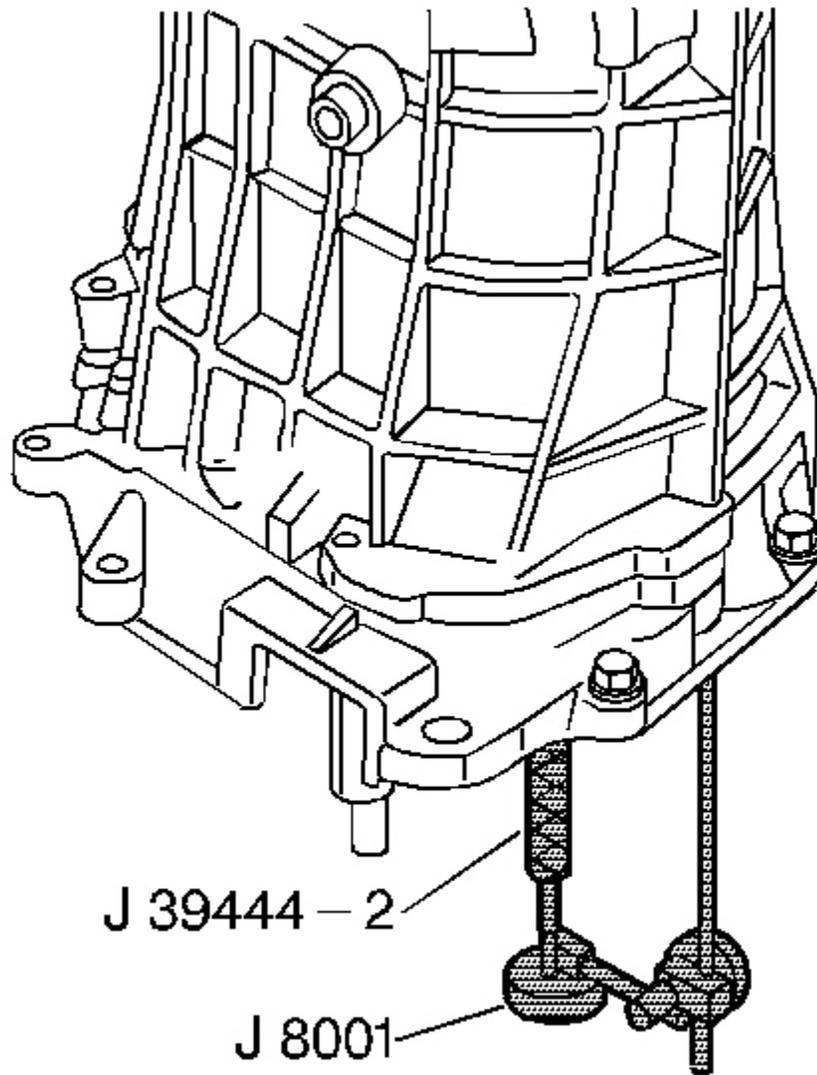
Measure Countershaft Extension End Play Using J 8001 & J 39444-2
